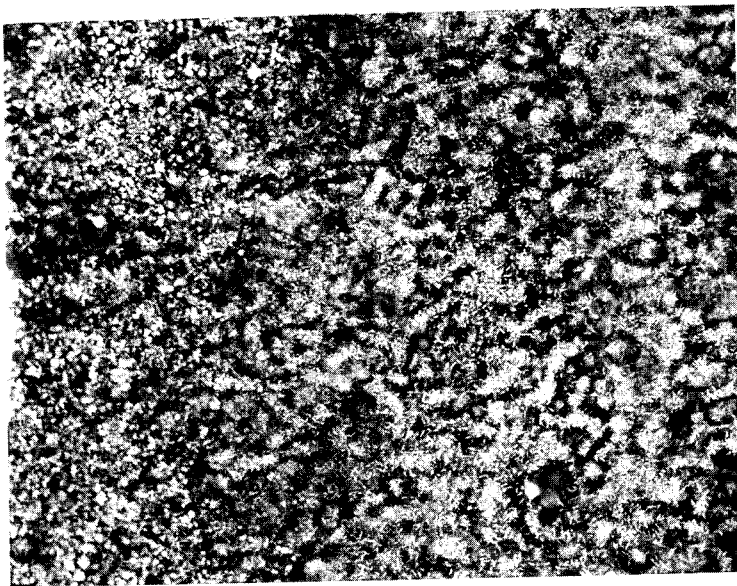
SEM fractograph showing the featureless morphology within the forming seam. Mag. 1500x.
